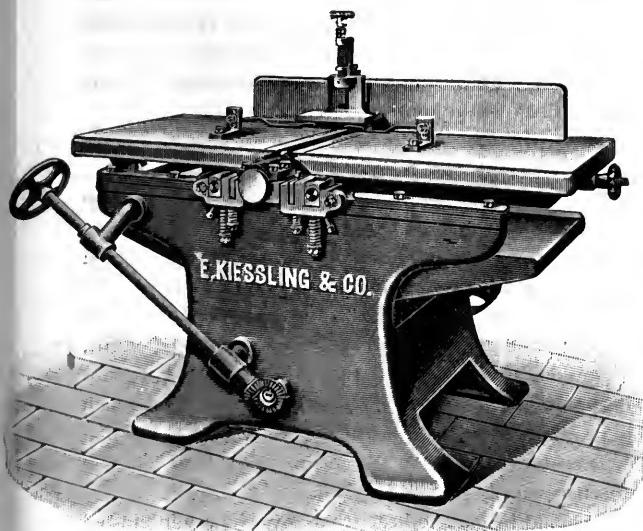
COMBINED PLANING, JOINTING, MOULDING, AND THICKNESSING MACHINE.
